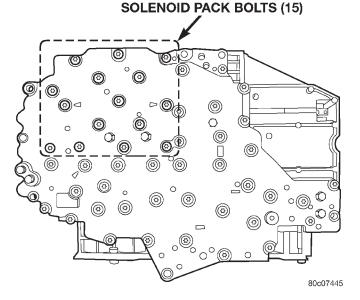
Solenoid and Pressure Switch Assembly Screws
